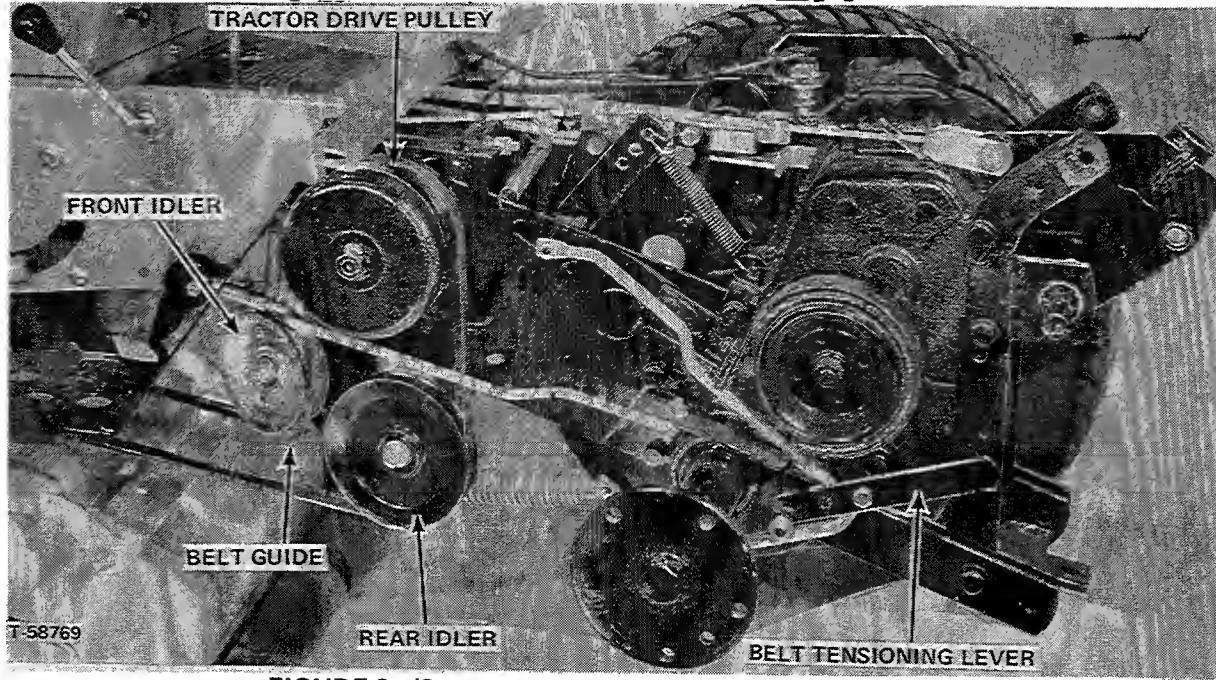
(Seat Deck and L.H. Rear Wheel Removed)
